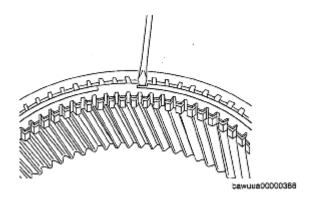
Removing Snap Ring From Rear Planetary Ring Gear Courtesy of MAZDA MOTORS CORP.
